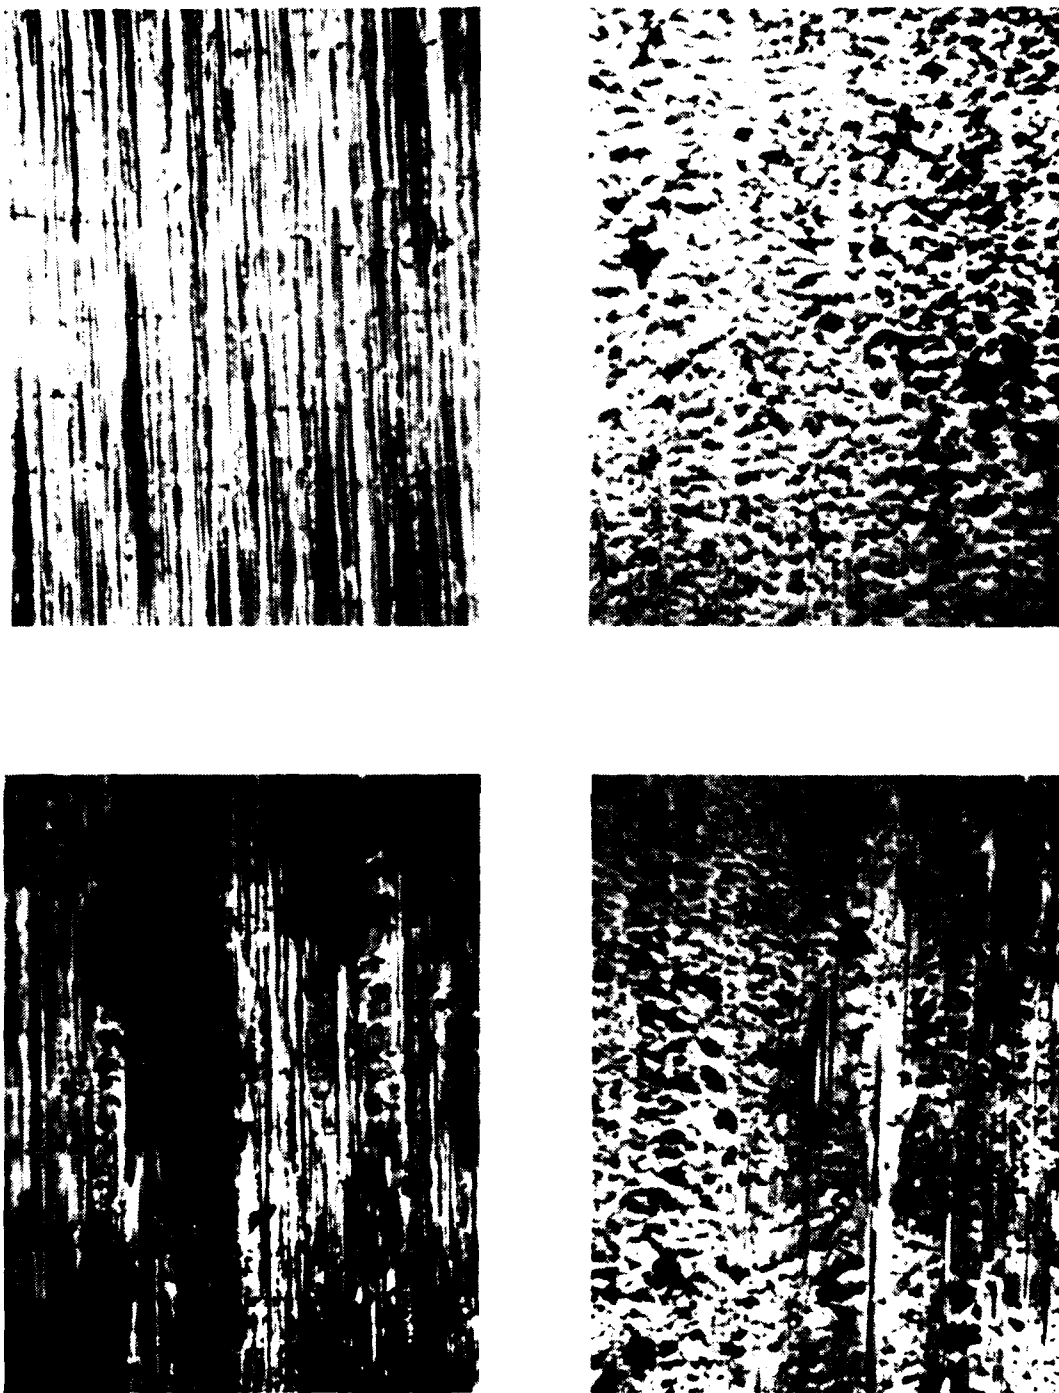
Optical photographs of surfaces of rolling contact fatigue samples at a magnification of 81x. Upper left is appearance of pure rolling and 7% slip samples before and after testing in either the implanted or unimplanted condition. Upper right is 14% slip unimplanted sample and shows that original machining marks have been removed. Lower photographs are for  $1 \times 10^{17}/\text{cm}^2$  left and  $2 \times 10^{17}/\text{cm}^2$  right Cr implanted samples. 150 keV. Tested with 14% slip and these show somewhat less wear.
